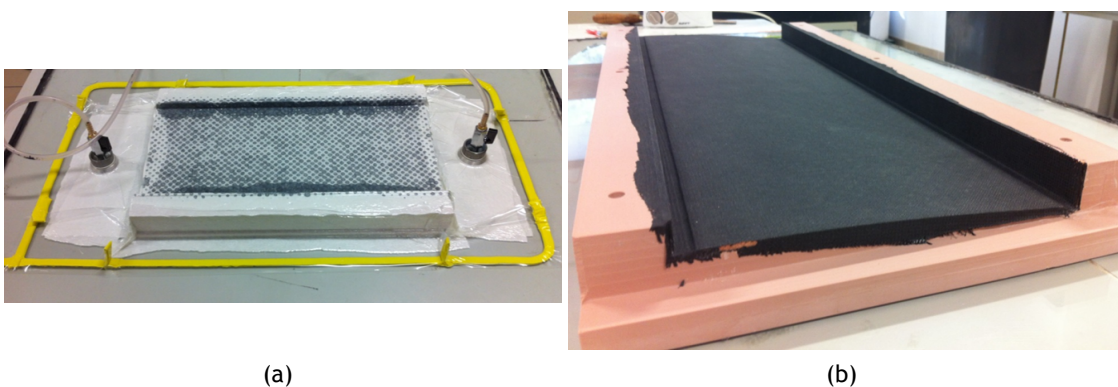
Prototype manufacturing showing the wing-box half: (a) after applying vacuum and (b) after removing all the vacuum bagging tooling.
